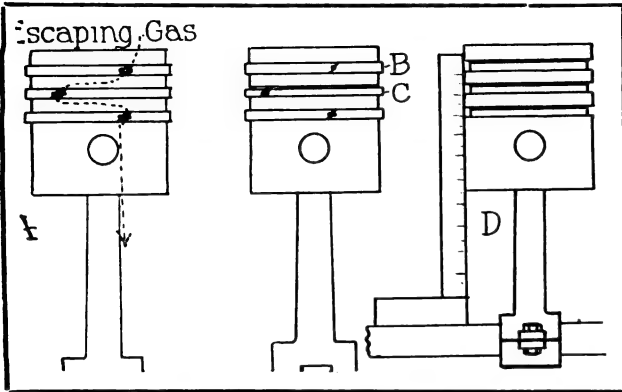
A, Gas Escaping Past Wide Piston Ring Slots; B, Well Fitted Piston Ring; C, Poor Fitting Piston Ring; D, Method of Aligning Piston on Mandrel.
